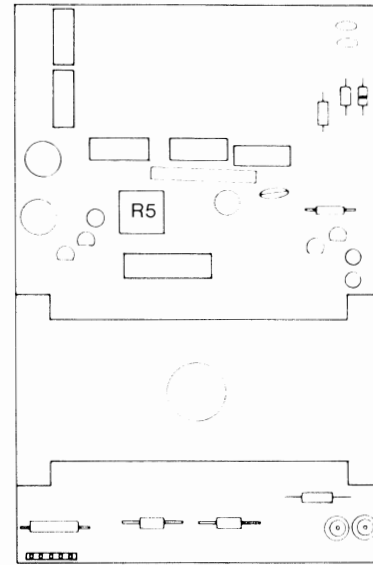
A. Large Circuit Board Assembly (3010, 3020, TECH 300, TECH 310)
